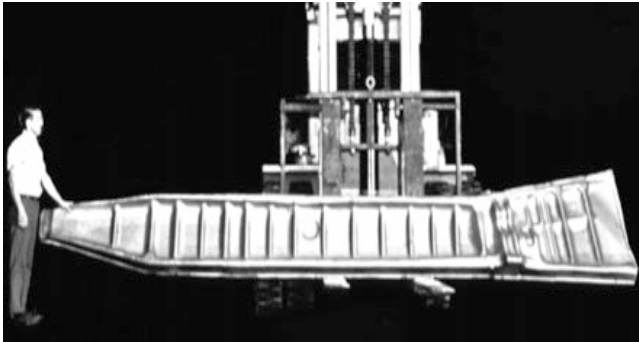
Large Ti-6Al-4V forging for Boeing 747 landing gear [37].
